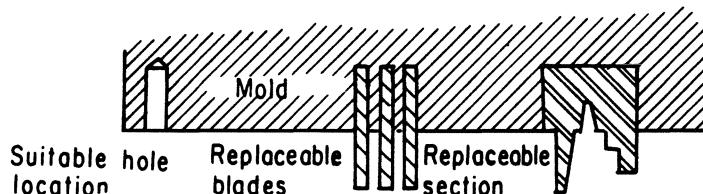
When delicate parts are molded, mold designs should provide for proper hole locations and replaceable blades and members in wall sections.
